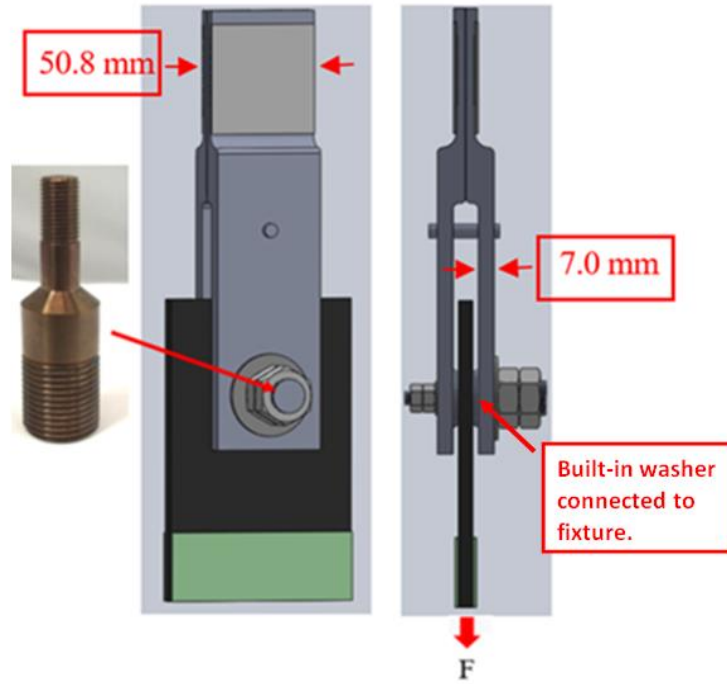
Double lap shear test configuration using a custom designed countersunk bolt. A torque load of 0.50 N-m (finger-tight) was used in this setup.
